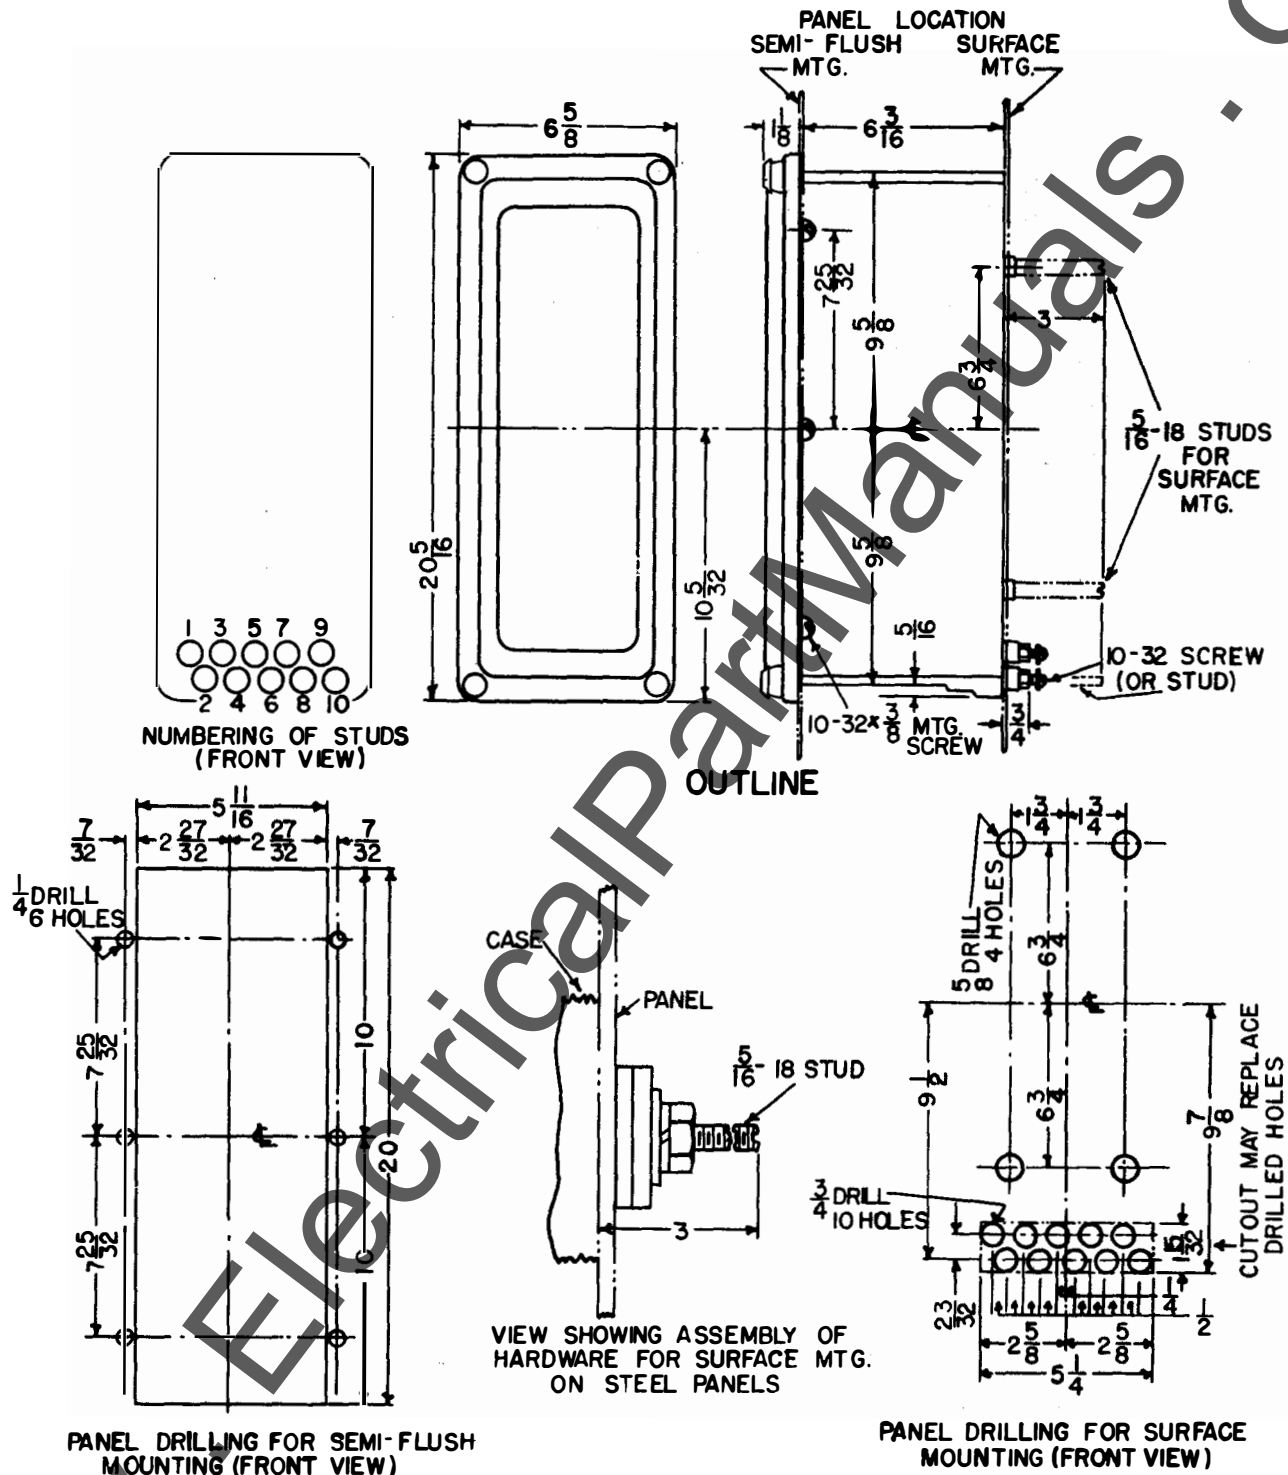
Outline And Panel Drilling Dimensions For Relay Types IJC51B And IJC53A
